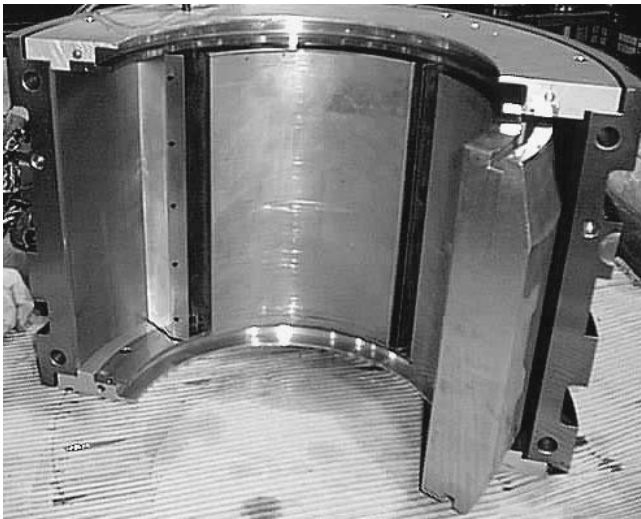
Pinion Bearing Split Open to Show Pads and Oil Inlet Spray Blocker Bars.
